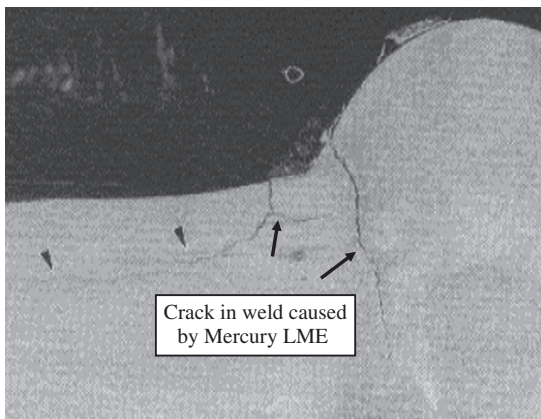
Photograph of a typical weld crack caused by liquid mercury embrittlement.
